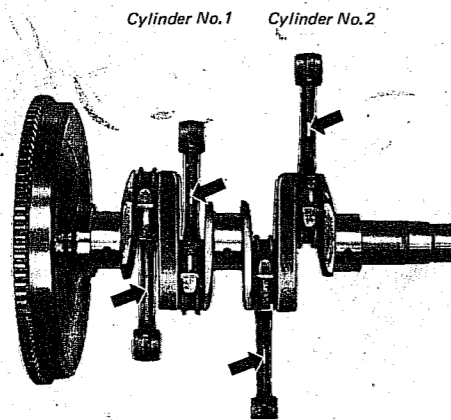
The crankshaft assembly must be installed with the marks indicated on the connecting rods facing upwards.
